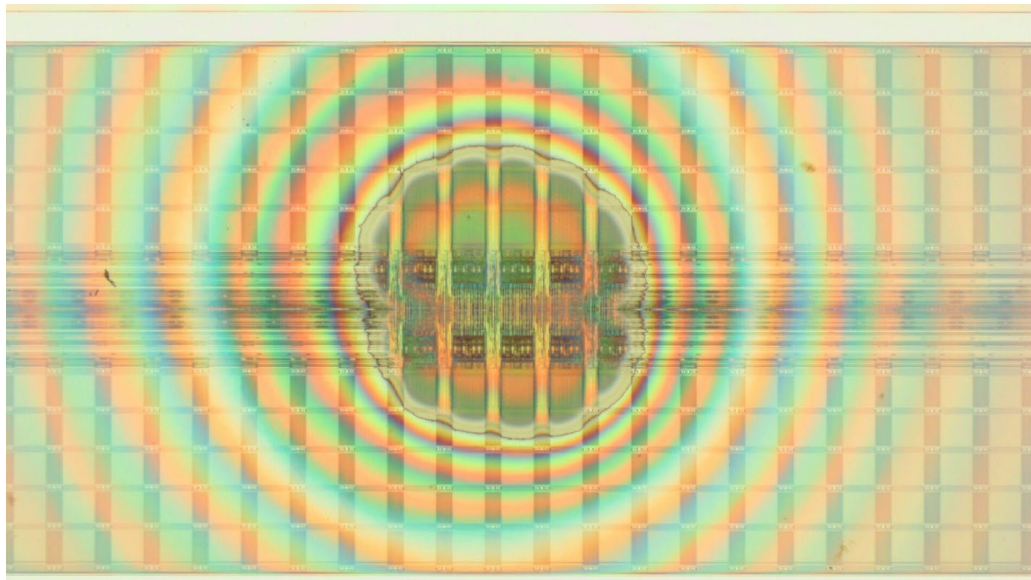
Inspection Image shows Passivation and Top Metal Removed
